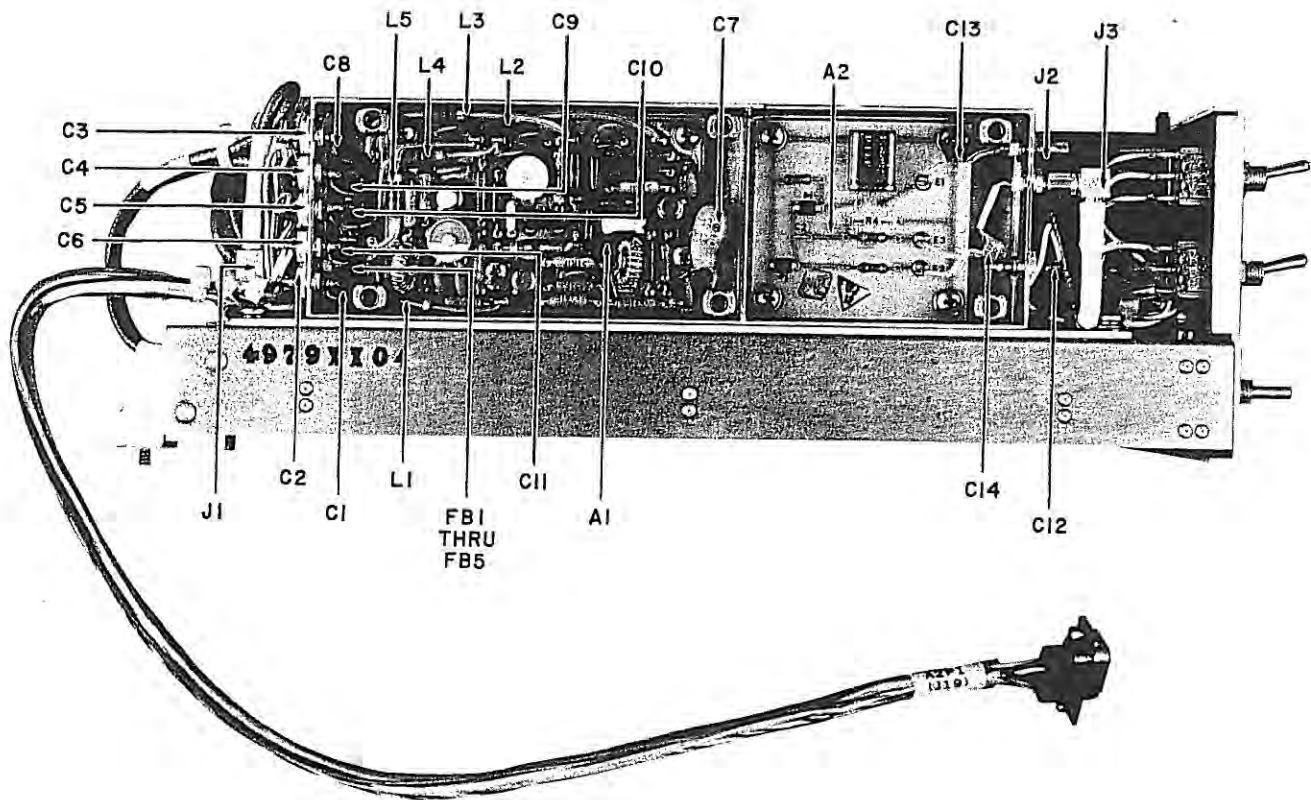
Type 774007-1 Oscillator Assembly (A2A3), Location of Components
